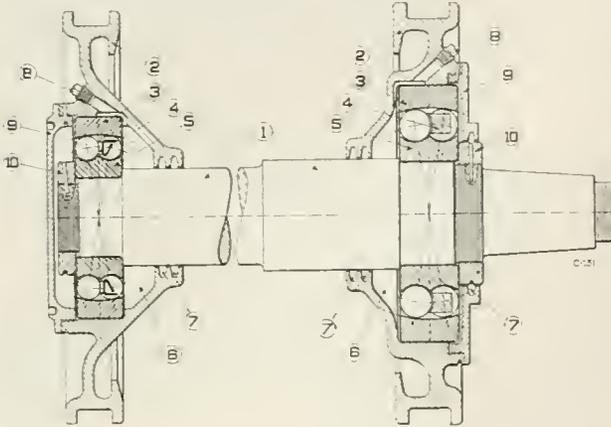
Mining Motor Heads. 1, Armature Shaft; 2, Motor Bearing Head; 3, Outer Bearing Race; 4, Balls and Retainer; 5, Inner Bearing Race; 6, Lubrication Chamber; 7, Gland to Seal Lubrication Chamber; 8, Grease Feed Pipe; 9, Outside Housing Cap; 10, Lock Nut to hold Inner Race Securely on Shaft
